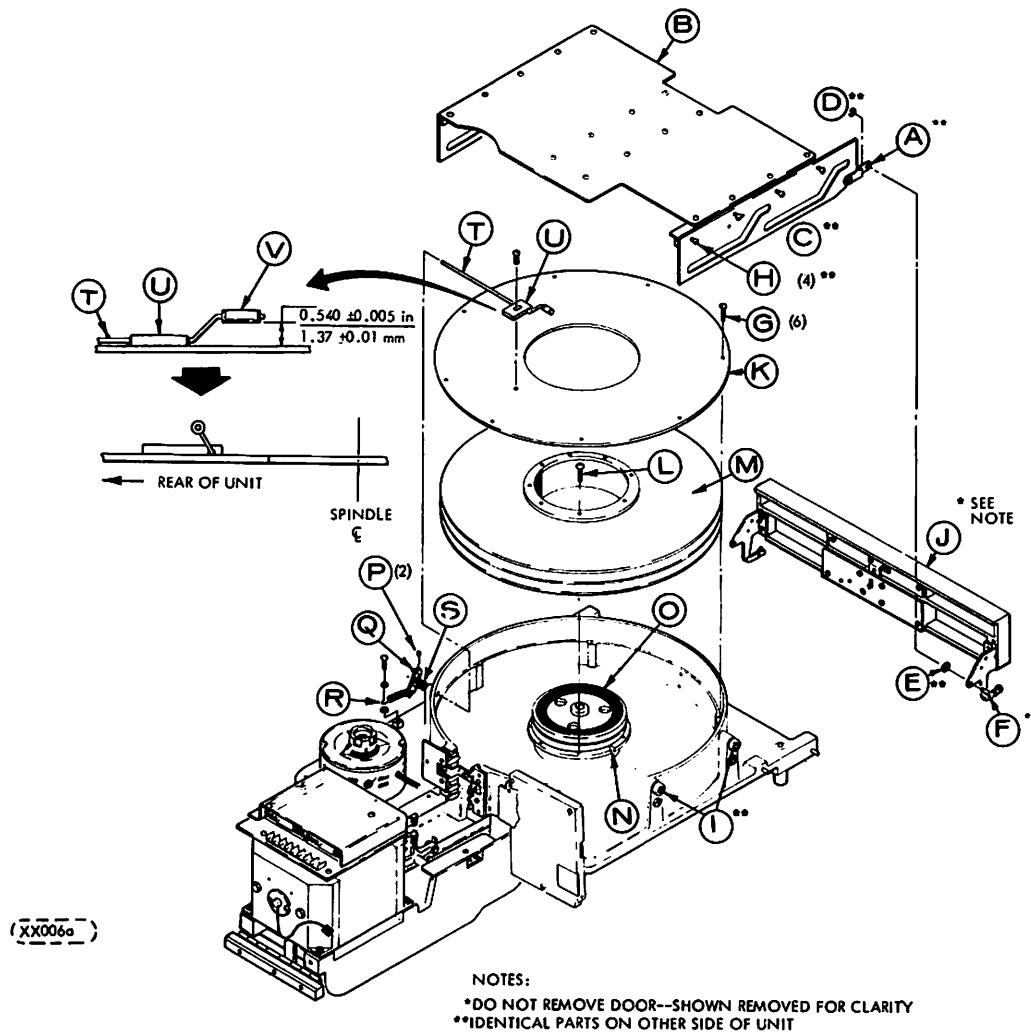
REMOVAL OF RECEIVER PLATE ASSEMBLY AND FIXED DISK PACK
